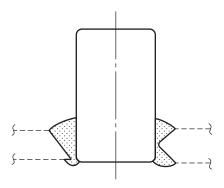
Acceptable Weld Nozzle Penetrators
